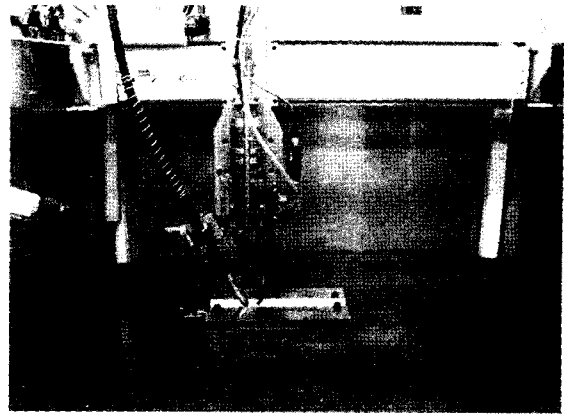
Nd:YAG laser-GMA hybrid welding system
